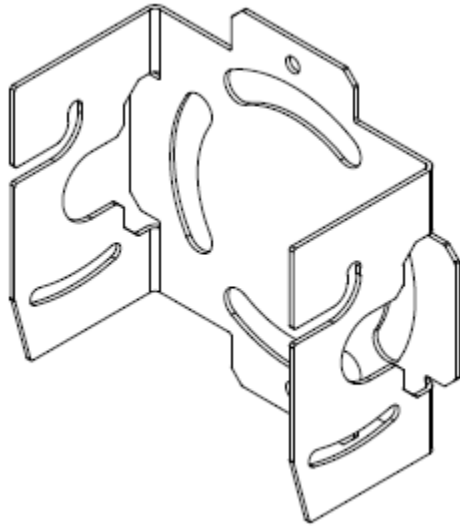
KT-147407-02 bracket 1-axis tilt part side view
